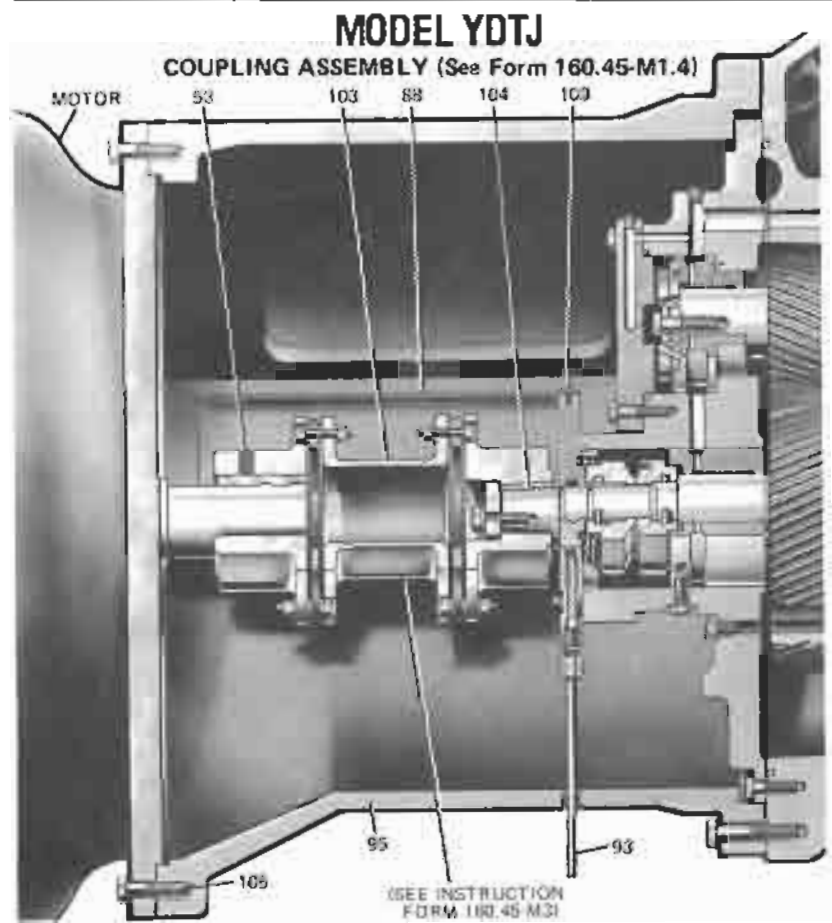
MODEL YTJ AND YDTJ COMPRESSOR AND MOTOR ASSEMBLY CUTAWAY
